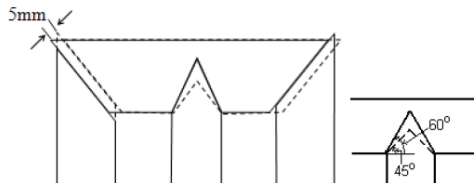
Transformer core type with the mix 60°-45° T-joint
